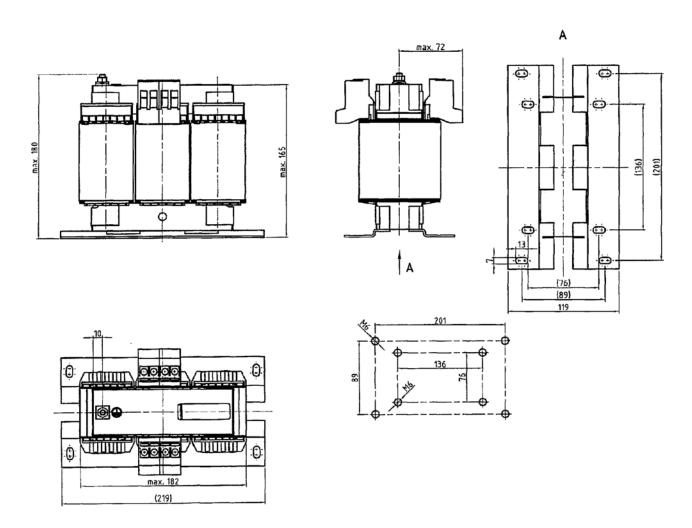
Dimension drawing of line reactor for Smart Line Module 16 kW
